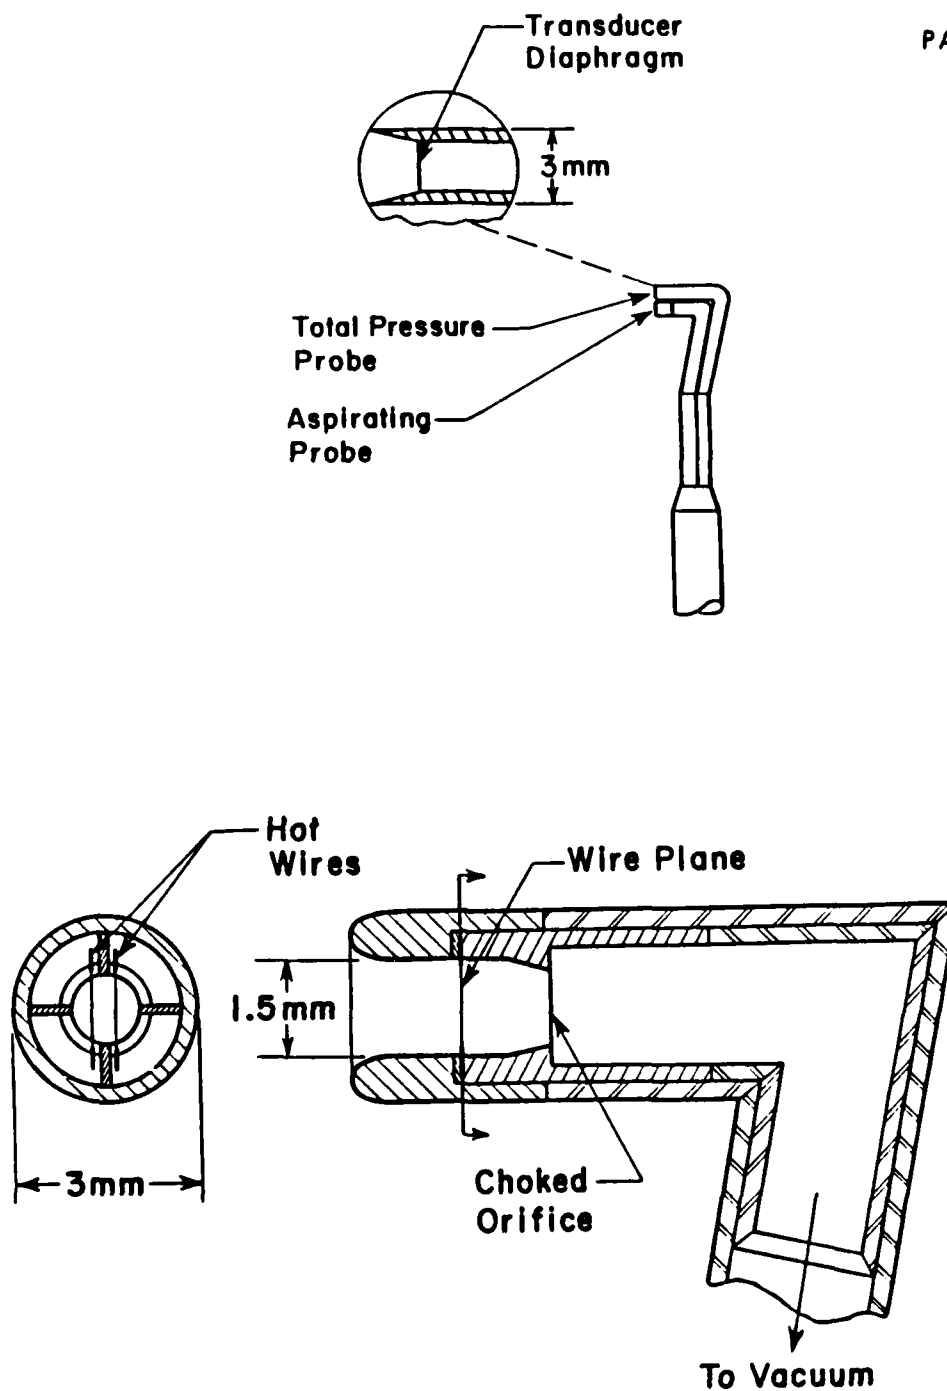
Schematic of Aspirating Probe/Total Pressure Probe Assembly; Cross-Section of Aspirating Probe
